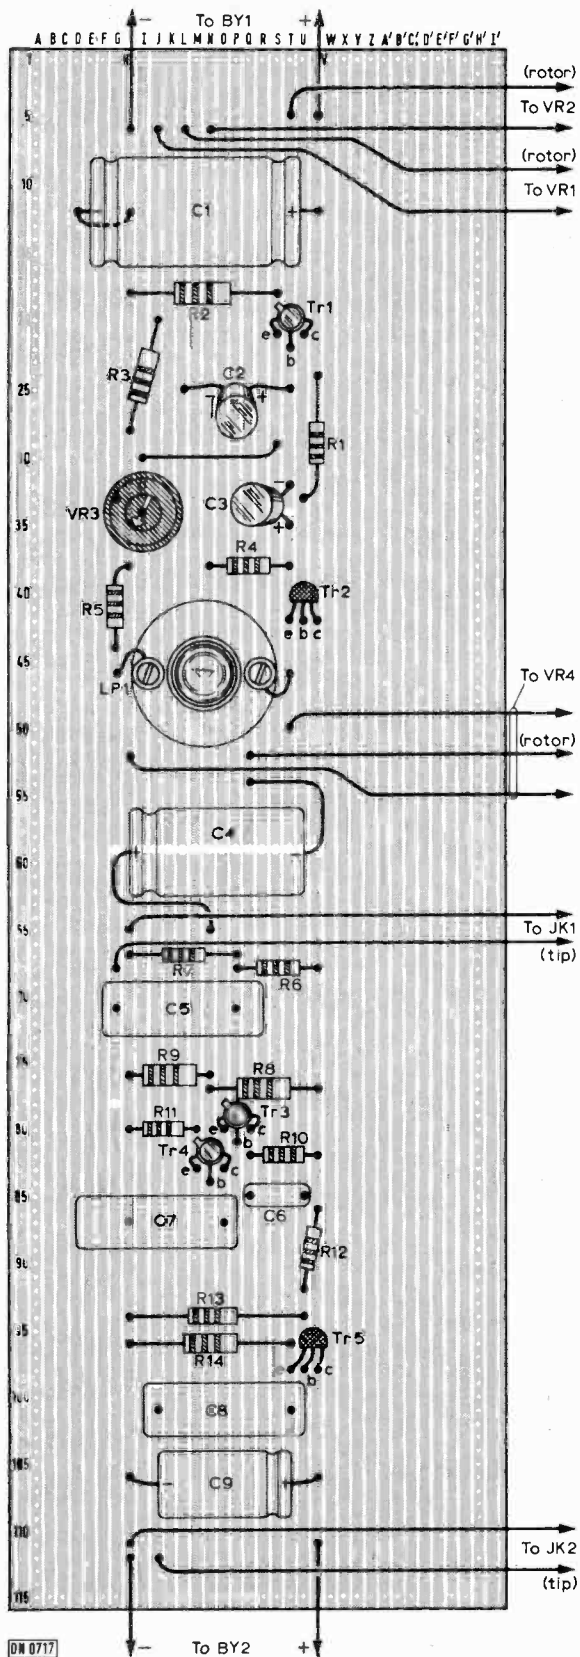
Layout of the circuit board. Breaks in copper rails are best made before fitting components.
